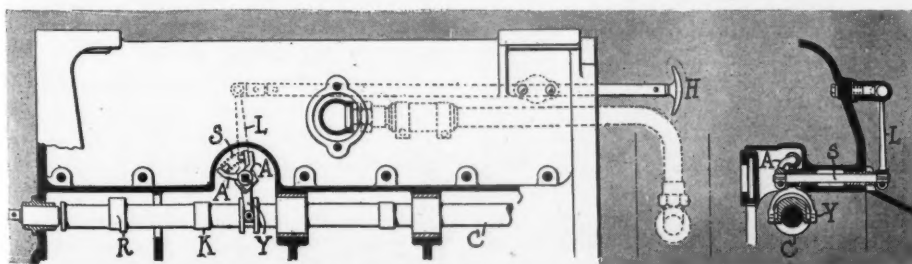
SHOWING RELIEF CAMS R AND HOW CAMSHAFT SLIDES
